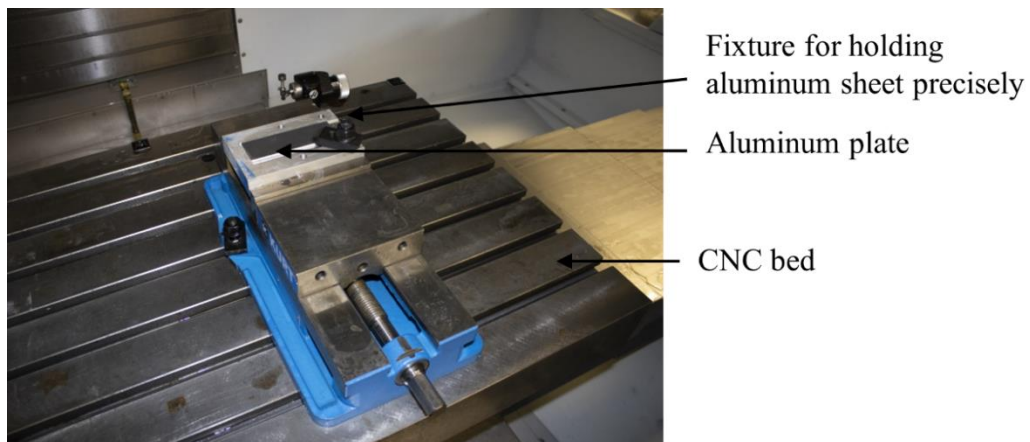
Experimental setup for milling pockets in aluminum sheets
